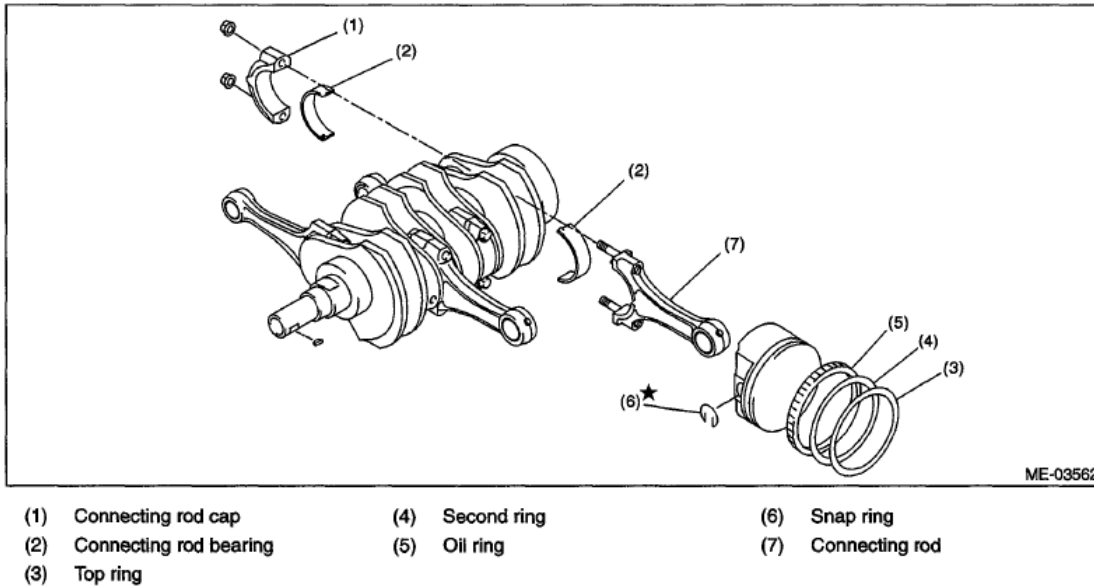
Identifying Connecting Rod, Connecting Rod Cap And Top Ring
